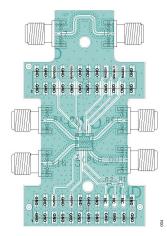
ADTR1107-EVALZ Assembly Drawing (J7, J8, R1, and R2 Not Installed)
